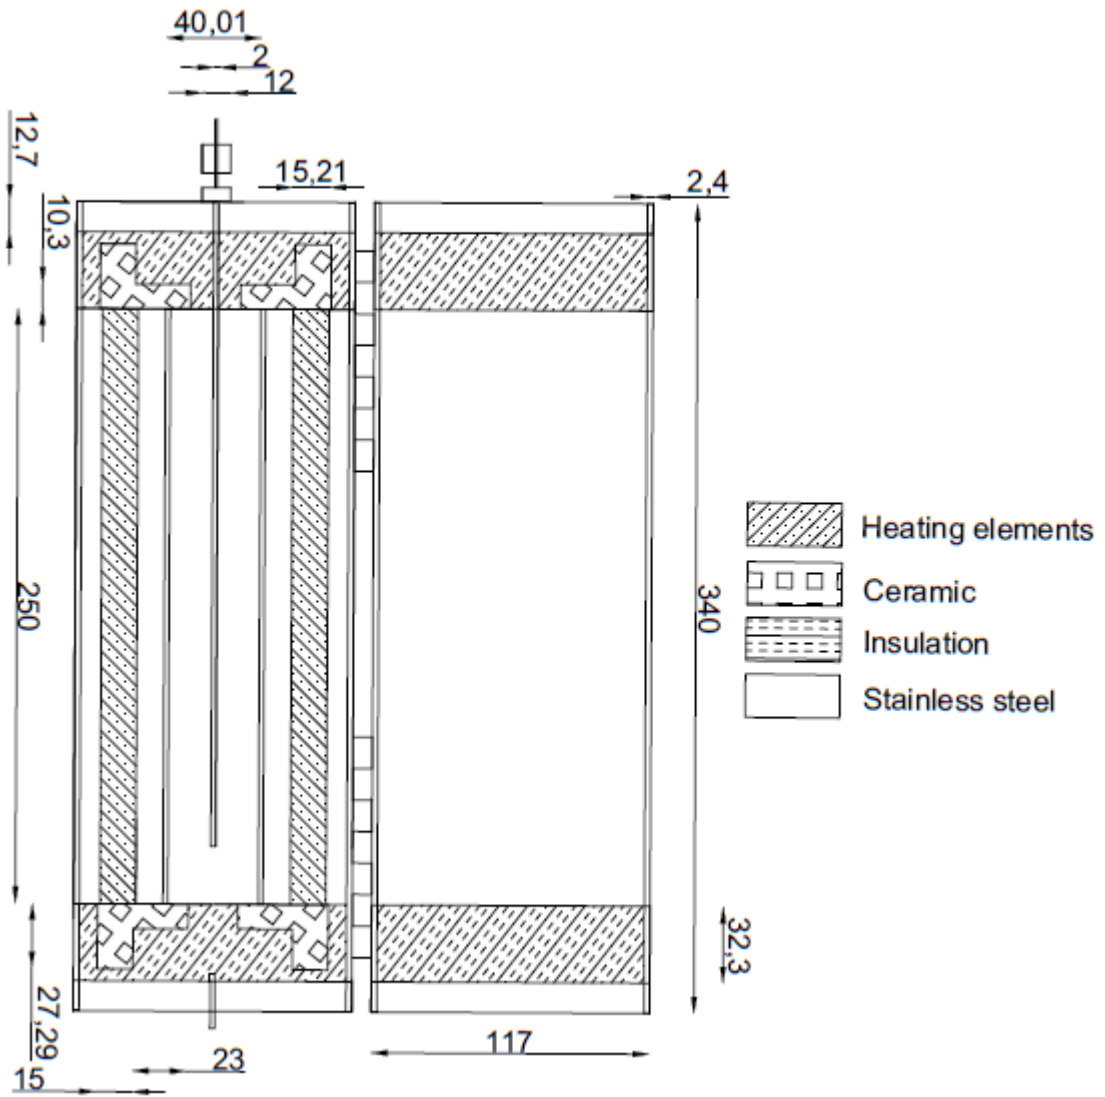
Mechanical drawing of Unit 5 – heat treatment (front cross-sectional view; dimensions in mm)
